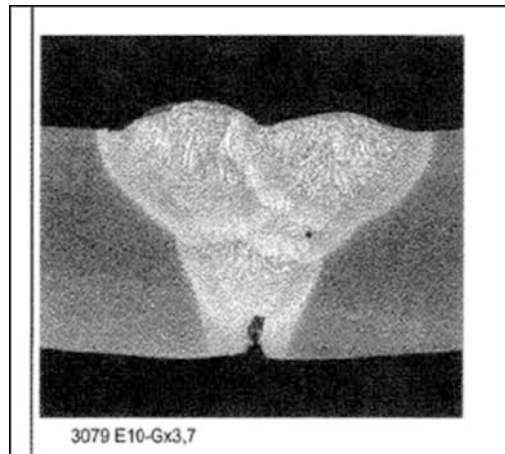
Weld seam with arc-welding without external magnetic fields
